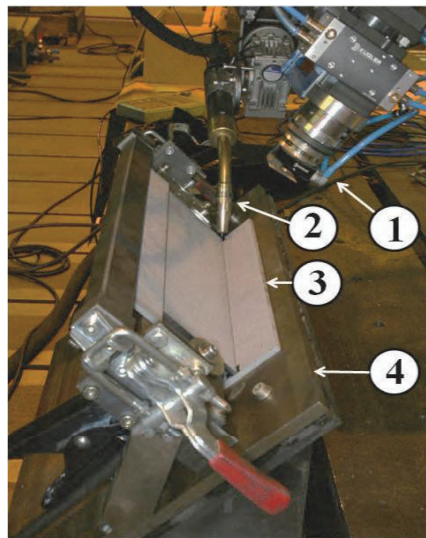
Experimental set-up for HLAW welding experiments. 1 = laser welding head, 2 = MAG welding torch, 3 = workpiece, 4 = fixing system.
